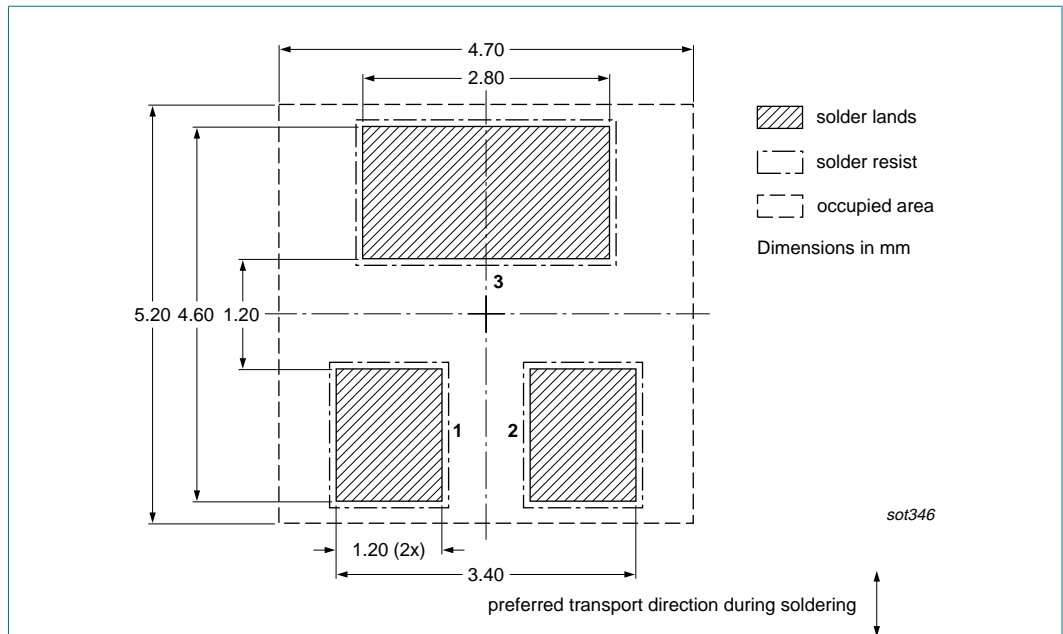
Wave soldering footprint SOT346 (SC-59A/TO-236)
